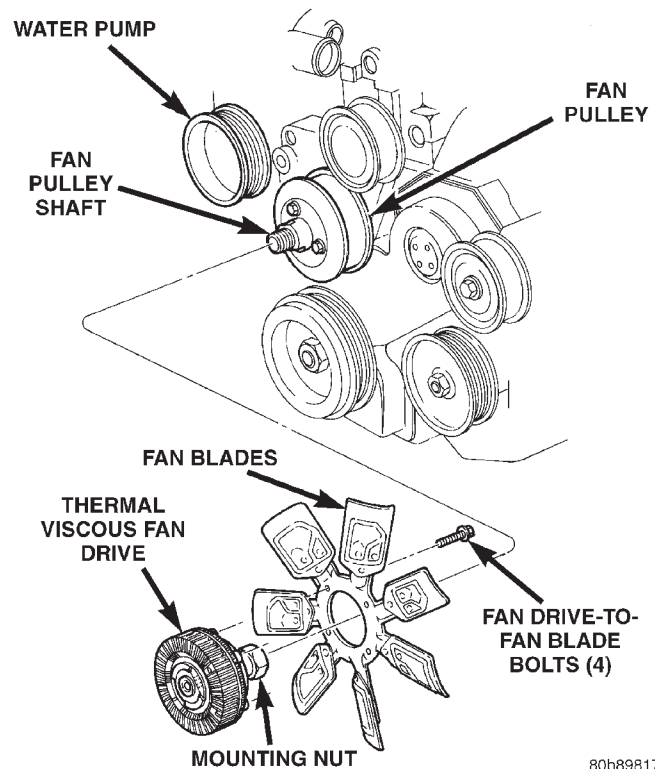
Thermal Viscous Fan Drive and Blade Assembly
